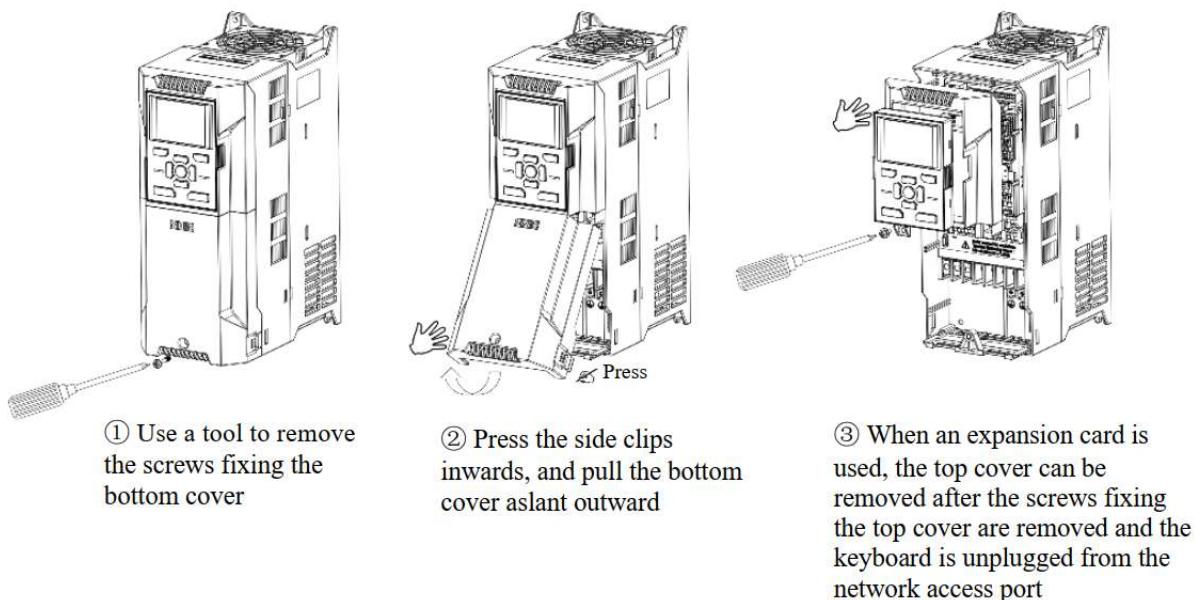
Illustration of 380V 0R7G/1R5P~022G/030P panel removal
